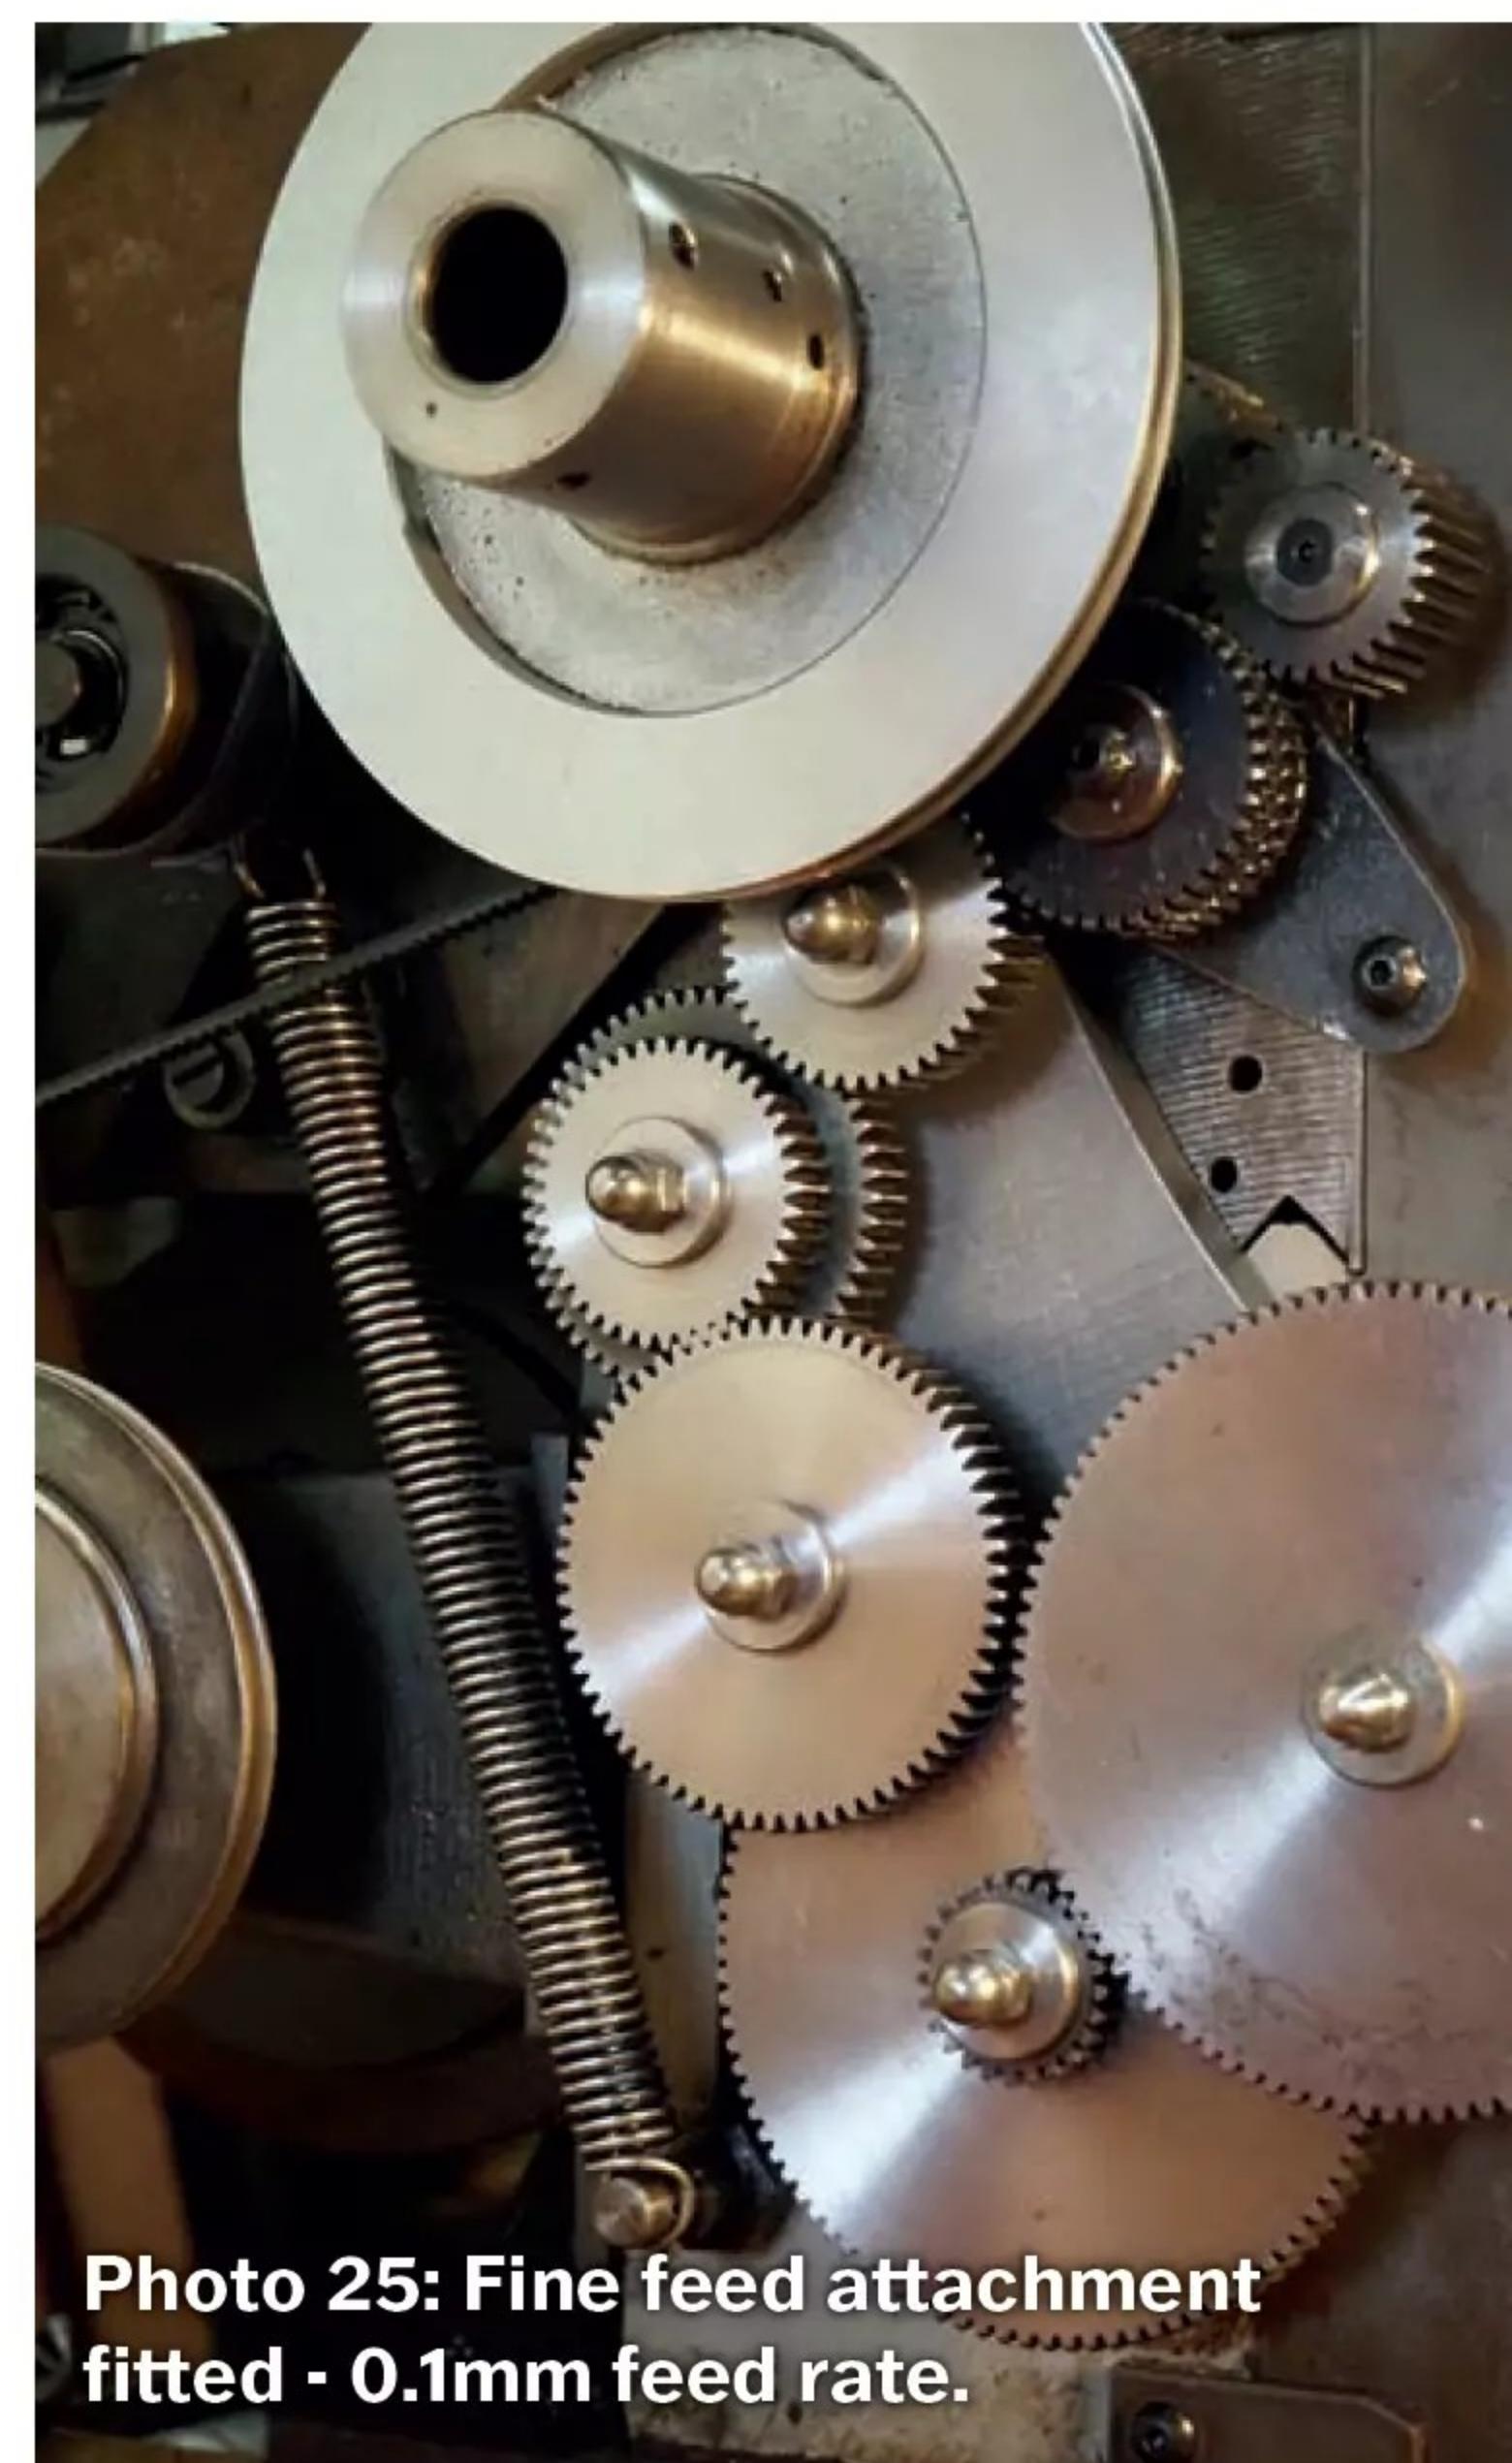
Fine feed attachment fitted - 0.1mm feed rate.
